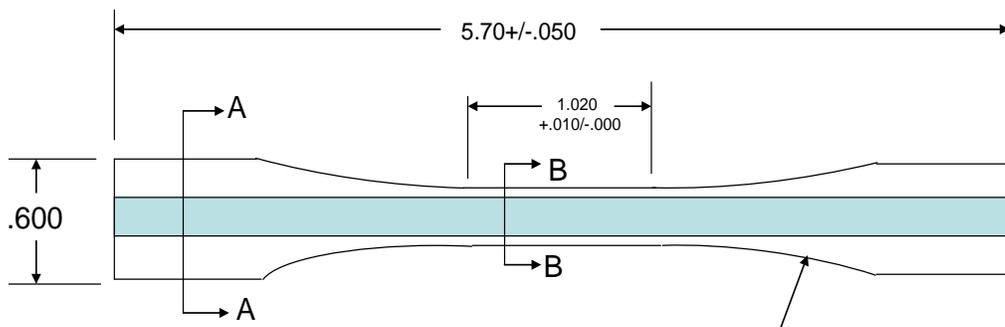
Schematic of "Clad" Test Coupons with TMC Section Highlighted in Blue (Courtesy of FMW)
